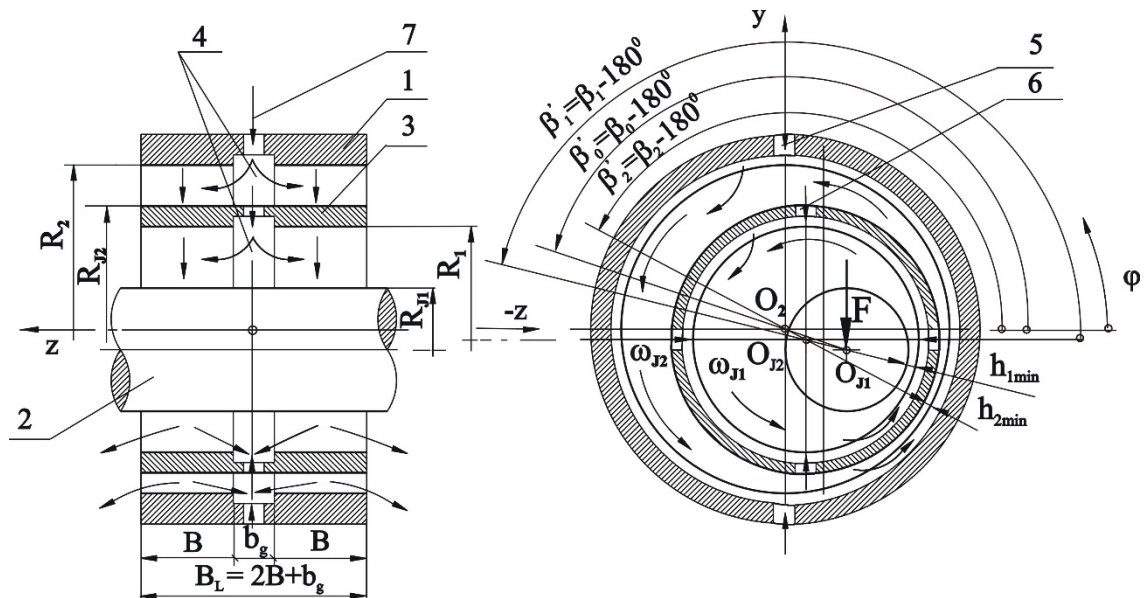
Geometry and oil flow direction in a radial slide bearing with a floating ring: 1 - fixed bearing bush, 2 – journal, 3 - floating ring, 4 - circumferential lubricant grooves, 5 and 6 - supply holes
